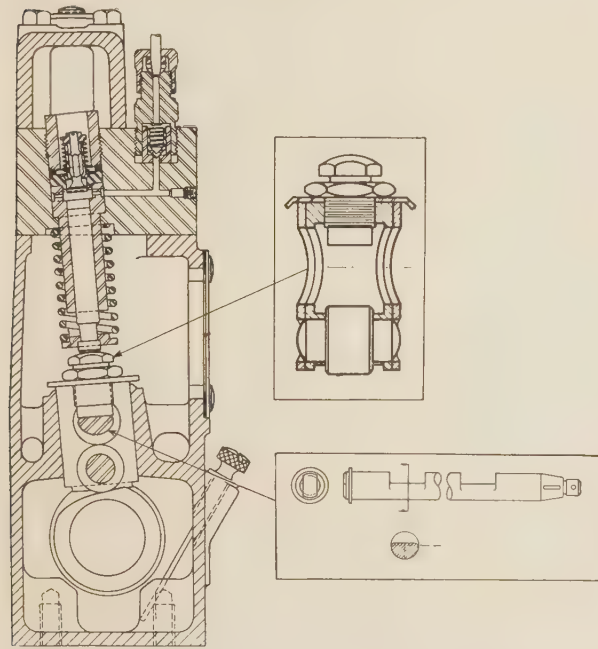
SECTIONAL VIEW OF THE DECO PUMP SHOWING THE SUCTION VALVE, PLUNGER AND BARREL, AND THE TAPPET ASSEMBLY
